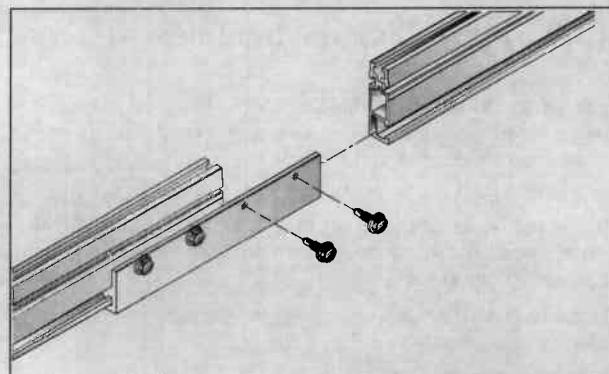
Splice bars slide into the footing bolt slots of SolarMount rail sections.
